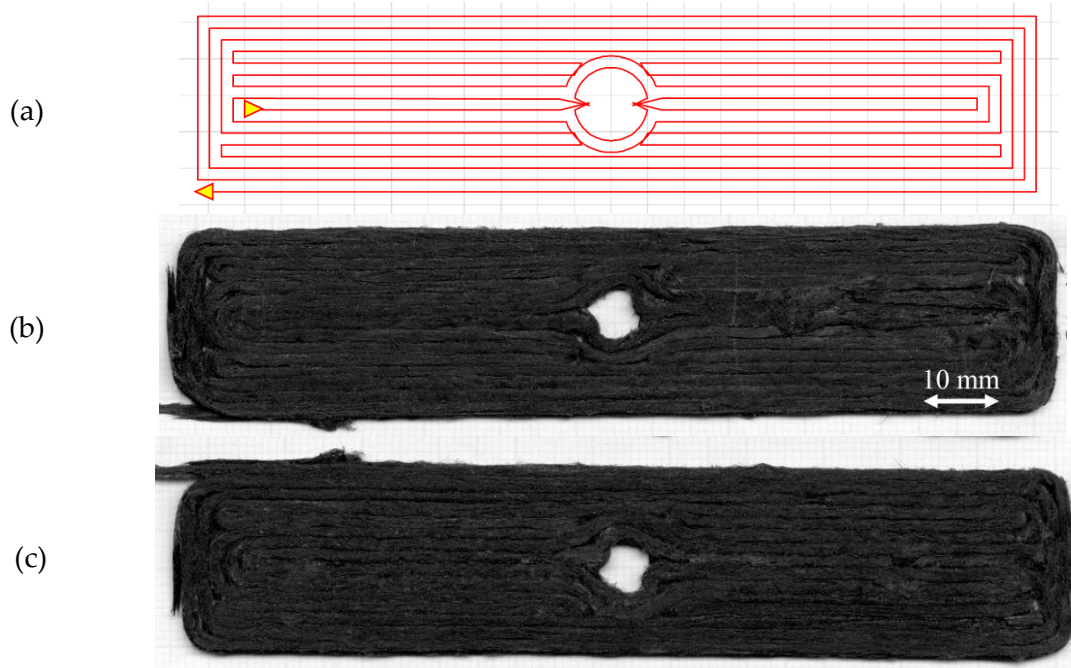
Modified curvilinear open-hole printing: (a) modified printing path with the overshooting inward through the centre of the hole; (b) and (c) example of the printed sample on top and bottom (attached to bed) surface.
